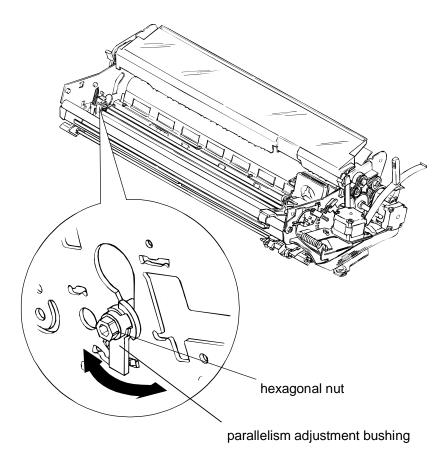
Adjusting the Parallelism of the Carriage Guide Shaft
